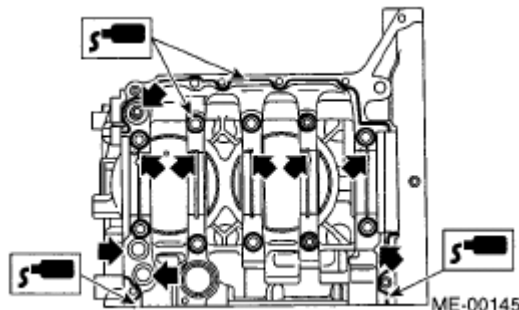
Identifying Liquid Gasket Applying Area Of Cylinder Block
